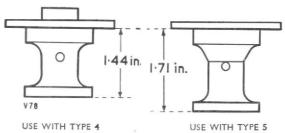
Igniter plug mounting adapters, Ghost 48 Mk. I.
